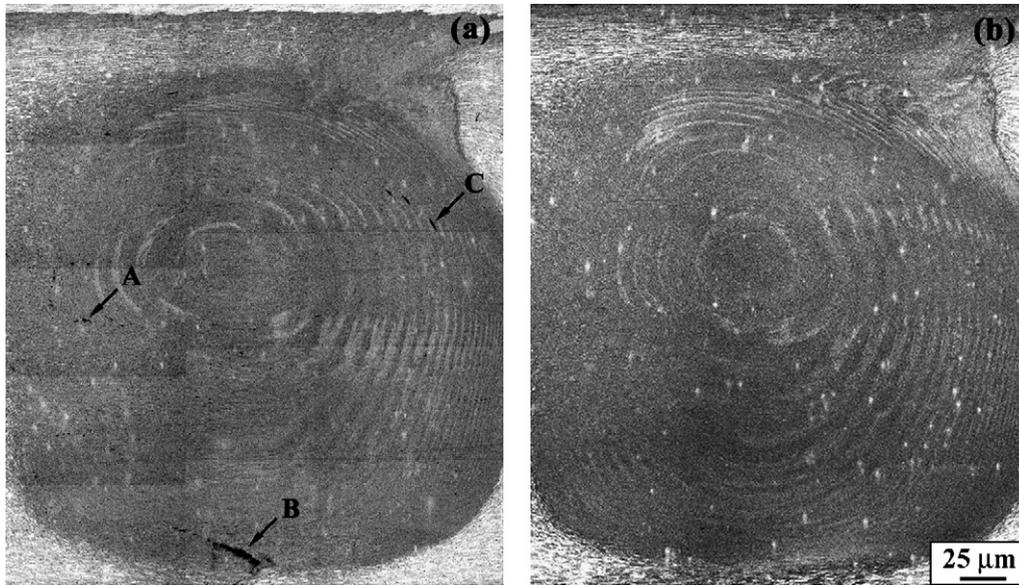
Optical micrographs showing (a) zigzag micro-crack and discontinuous cavities on PW-T6 butt weld and (b) defect-free as-welded butt weld.
